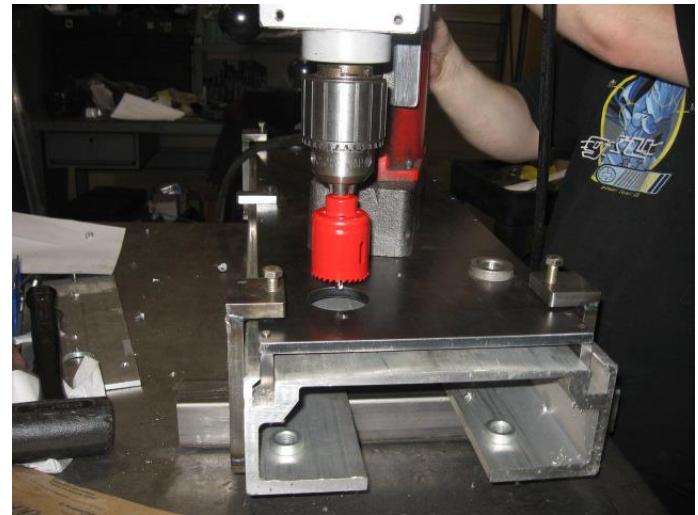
Back structure After Machining Figure 5: Rivnut Tool
